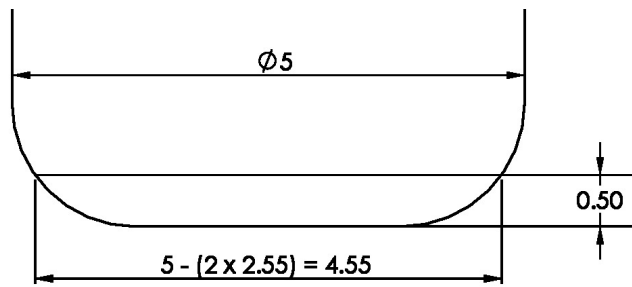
C. Schematic of cutting tool dimensions for the machining of parametric blanks. Showing cutting radius, tool diameter and depth of cut.
